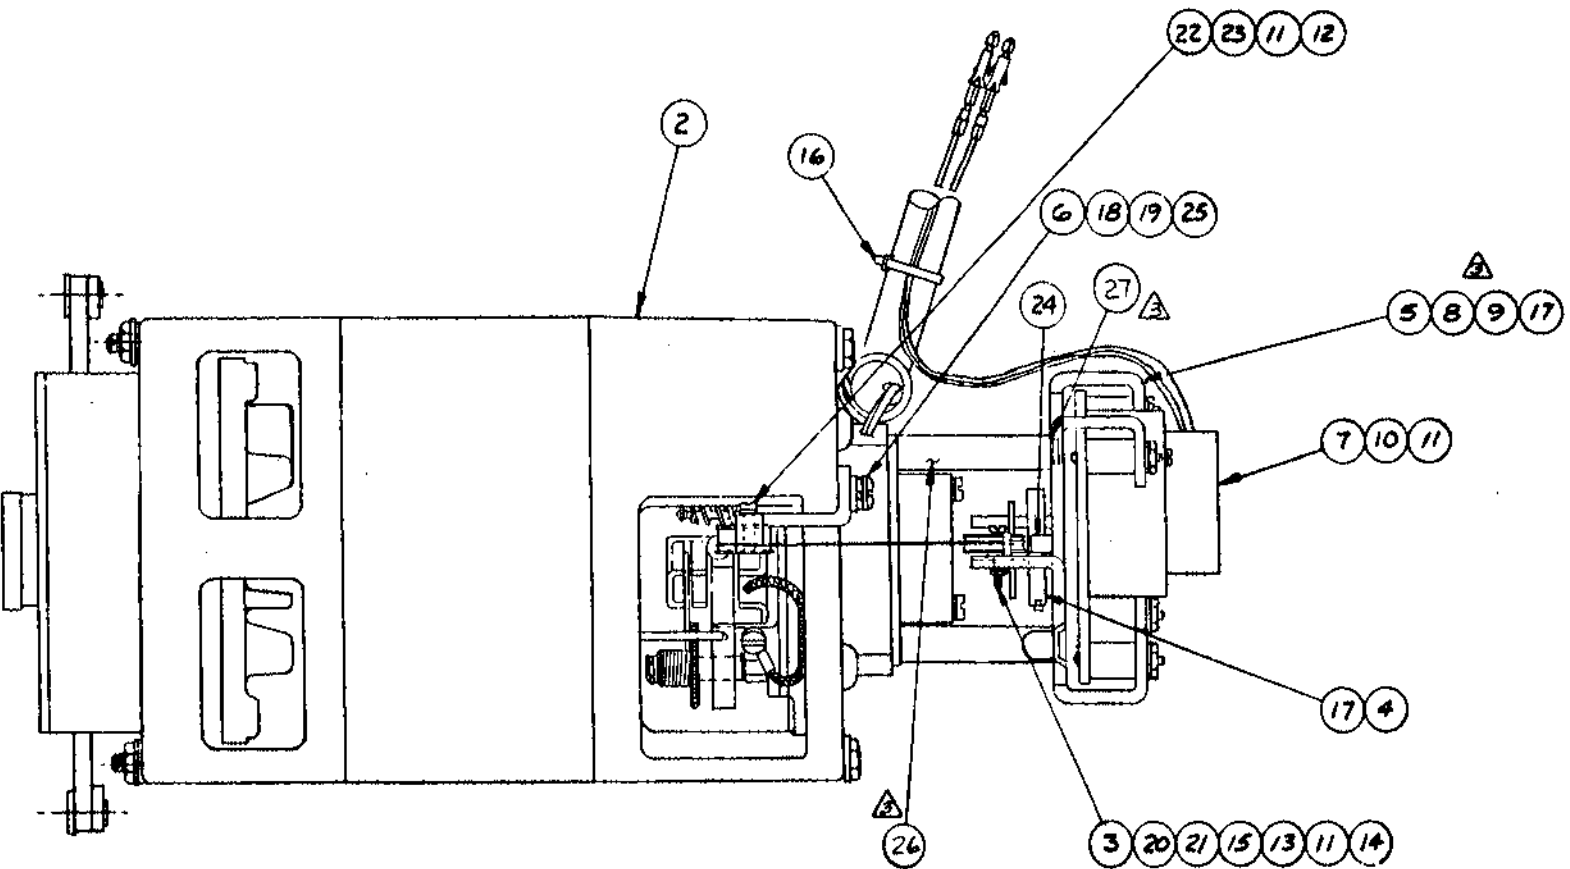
RC-5B Parts Location: Drive Motor and Brush Lift Assembly
